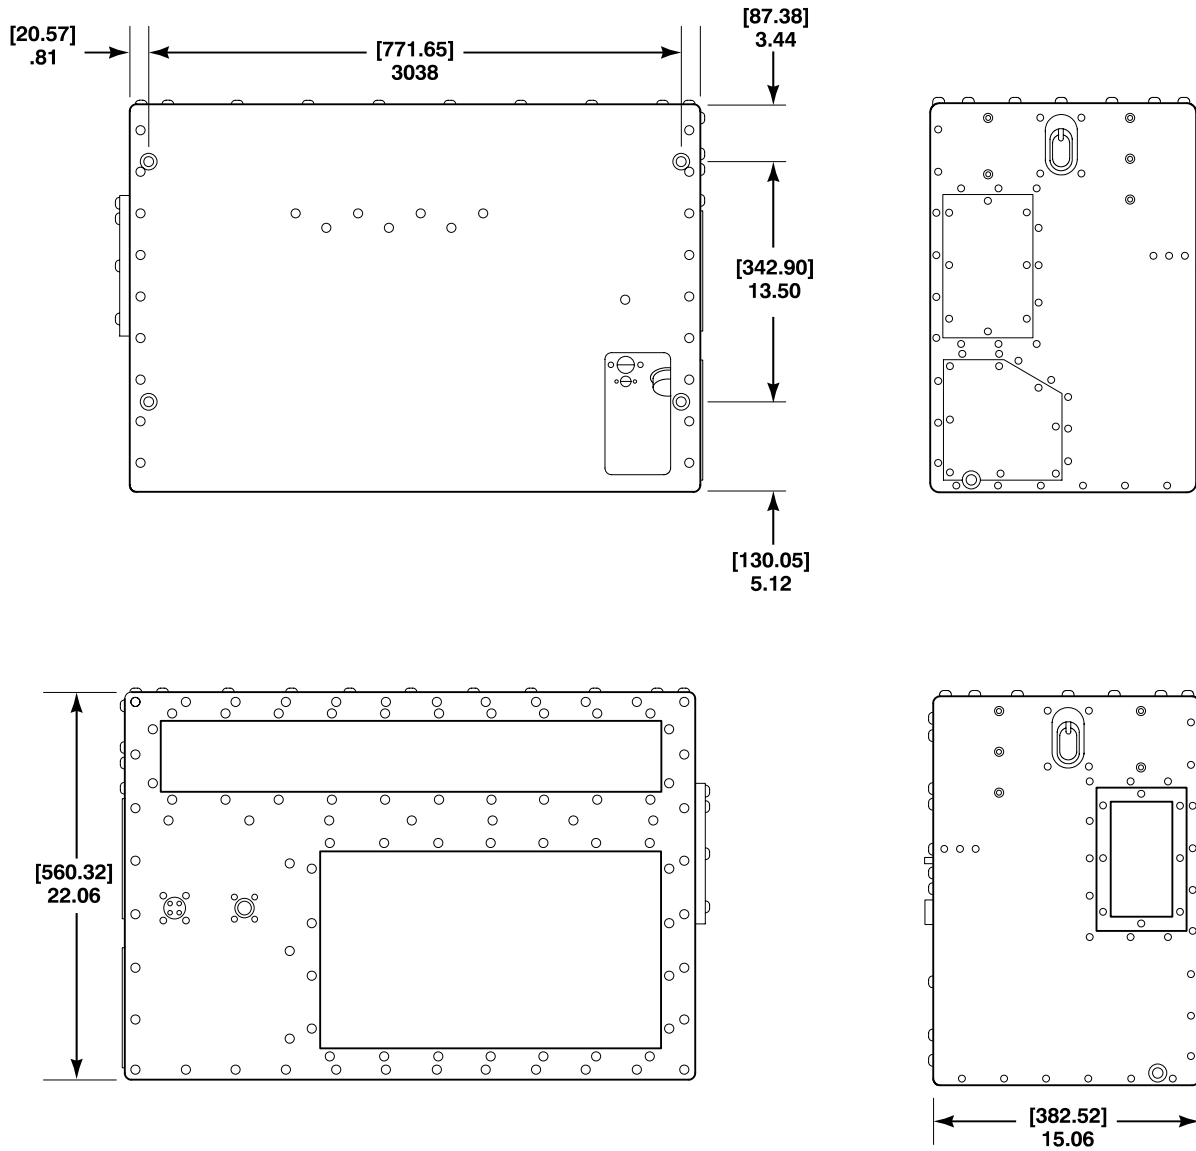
EVAPORATOR ASSEMBLY INSTALLATION DIMENSIONS.
